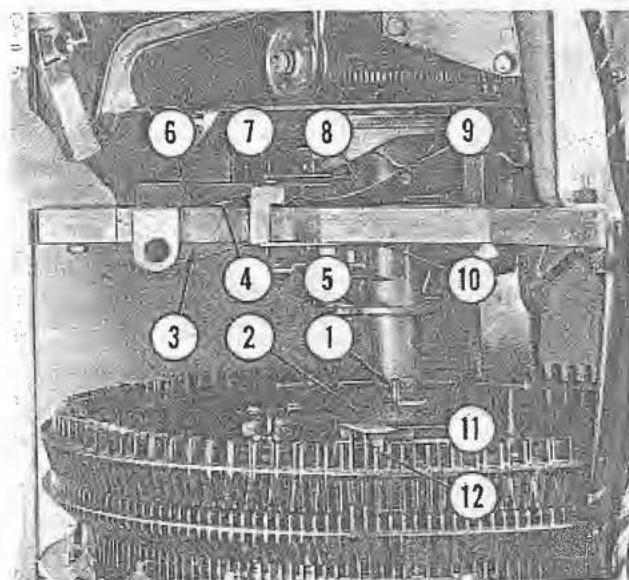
CANCEL LEVER ADJUSTMENT, 2400
